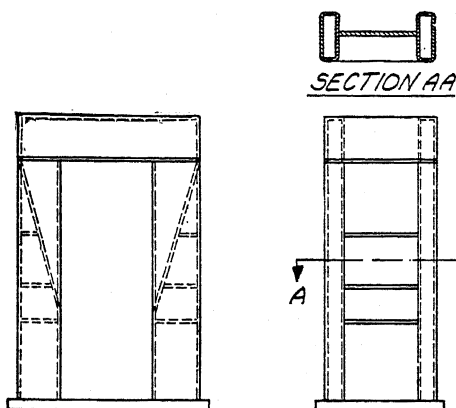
Baling press end frame with main members composed of formed plate arc welded to form hollow section.
